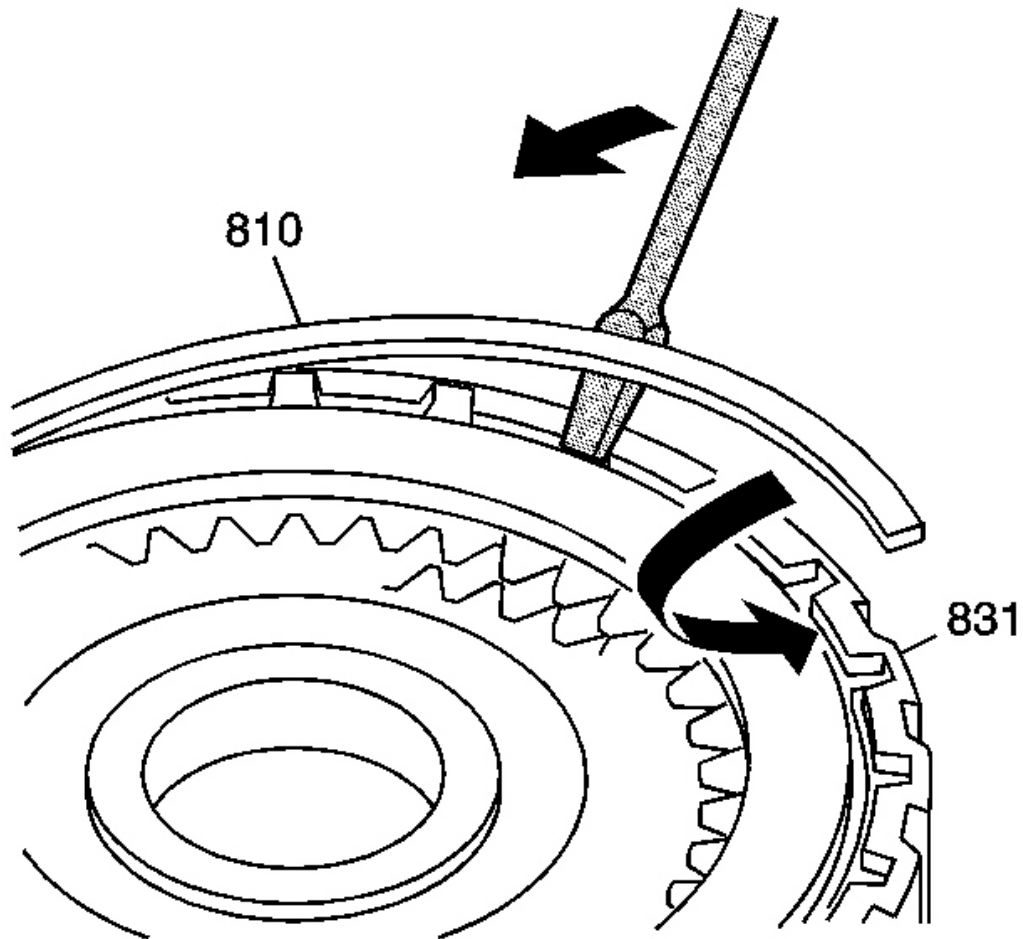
Installing 3rd Clutch Backing Plate Retaining Ring Into Groove Of 3rd Clutch Housing Using J 28585
